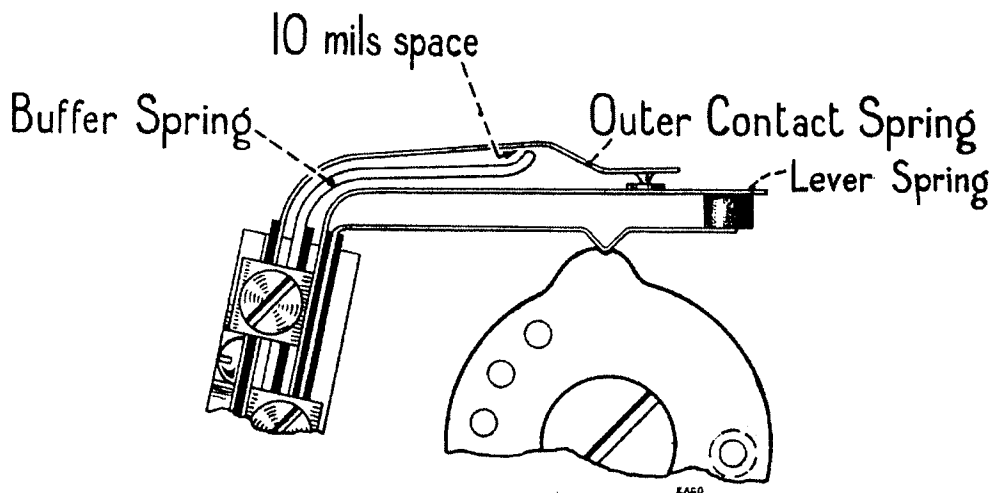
ADJUSTMENT OF AUXILIARY IMPULSE-CONTROL CAM
